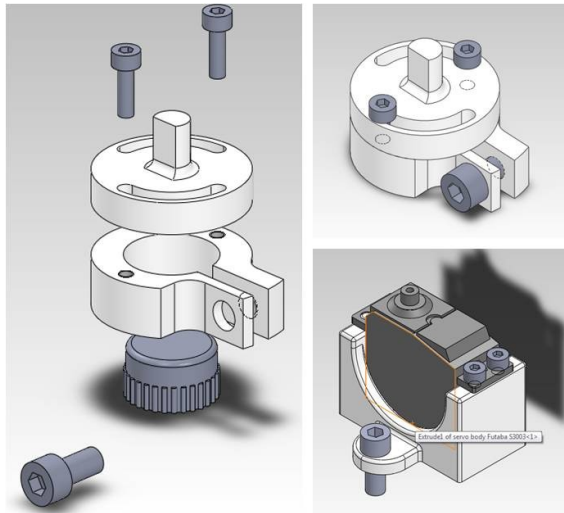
Servo mechanism to adjust the glow plug heat. Consists of flex torque shaft and several custom 3D printed clamping mechanisms.
